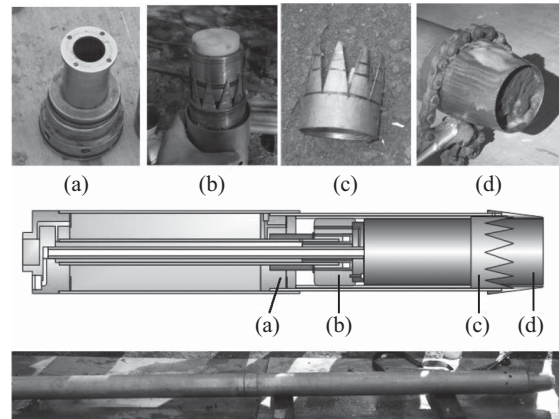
Parts of Gel-Push sampler. (a) Transfer tube, (b) Piston, (c) Catcher, and (d) Thin wall tube.
